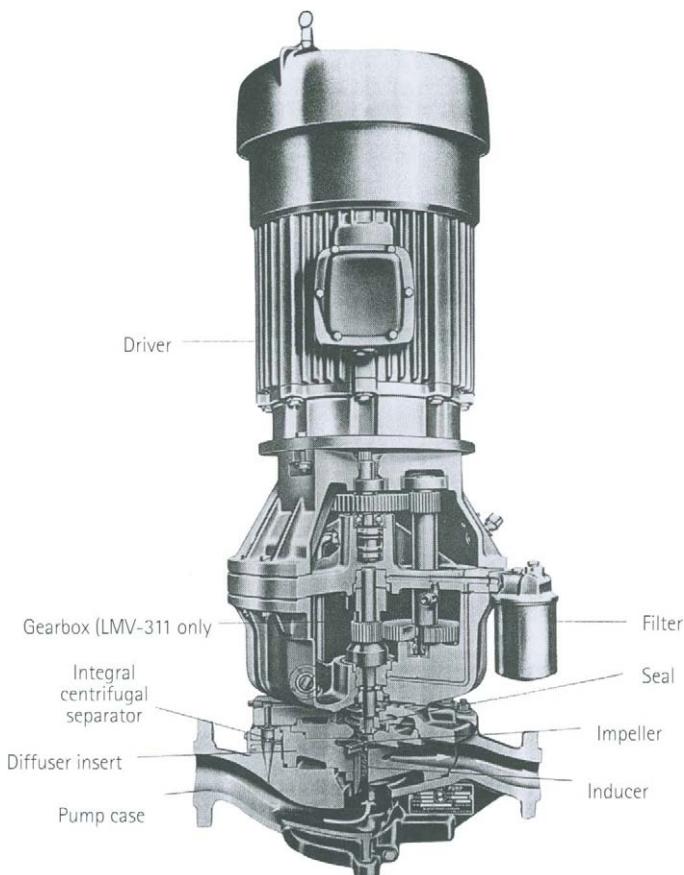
Integral gear centrifugal pump (Courtesy of Sunstrand Corp.)
